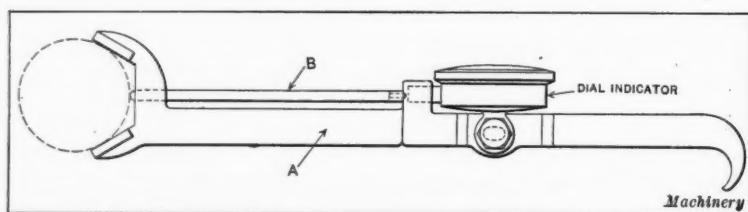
Three-point Dial Indicator for testing Crankpin Bearings, which can be applied while Work is in Motion
